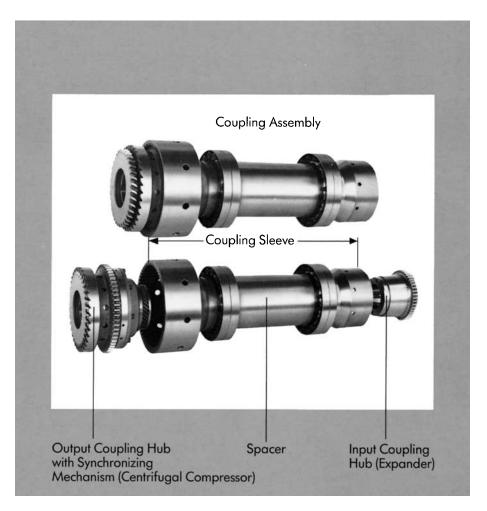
MS-14 clutch coupling assembly. (Source: MAAG Gear Company.)
